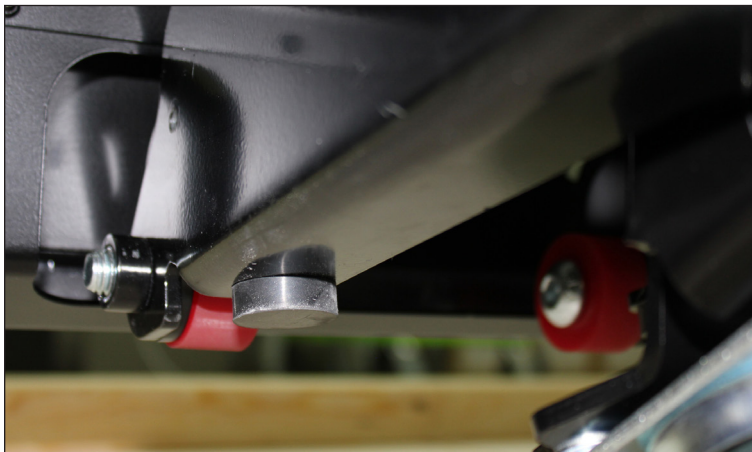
Reinstall Front Red Wheels Inside Caster Base
